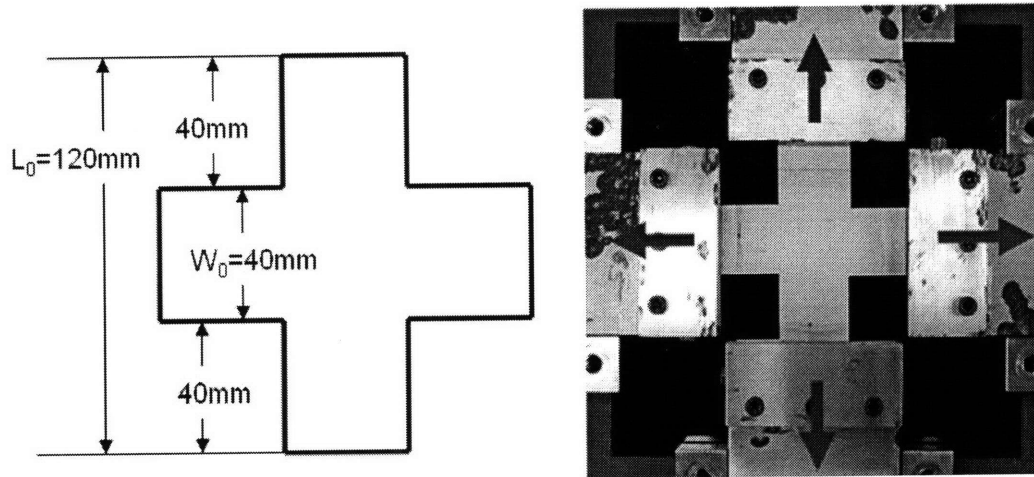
dimensions of biaxial test specimens and biaxial tensile test configuration
